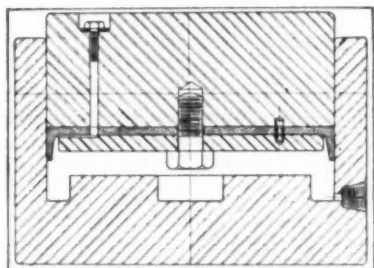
SECTION OF PLUNGER MECHANISM DEVELOPED FOR OBTAINING LOAD PRESSURES ON ROLLING MACHINERY
